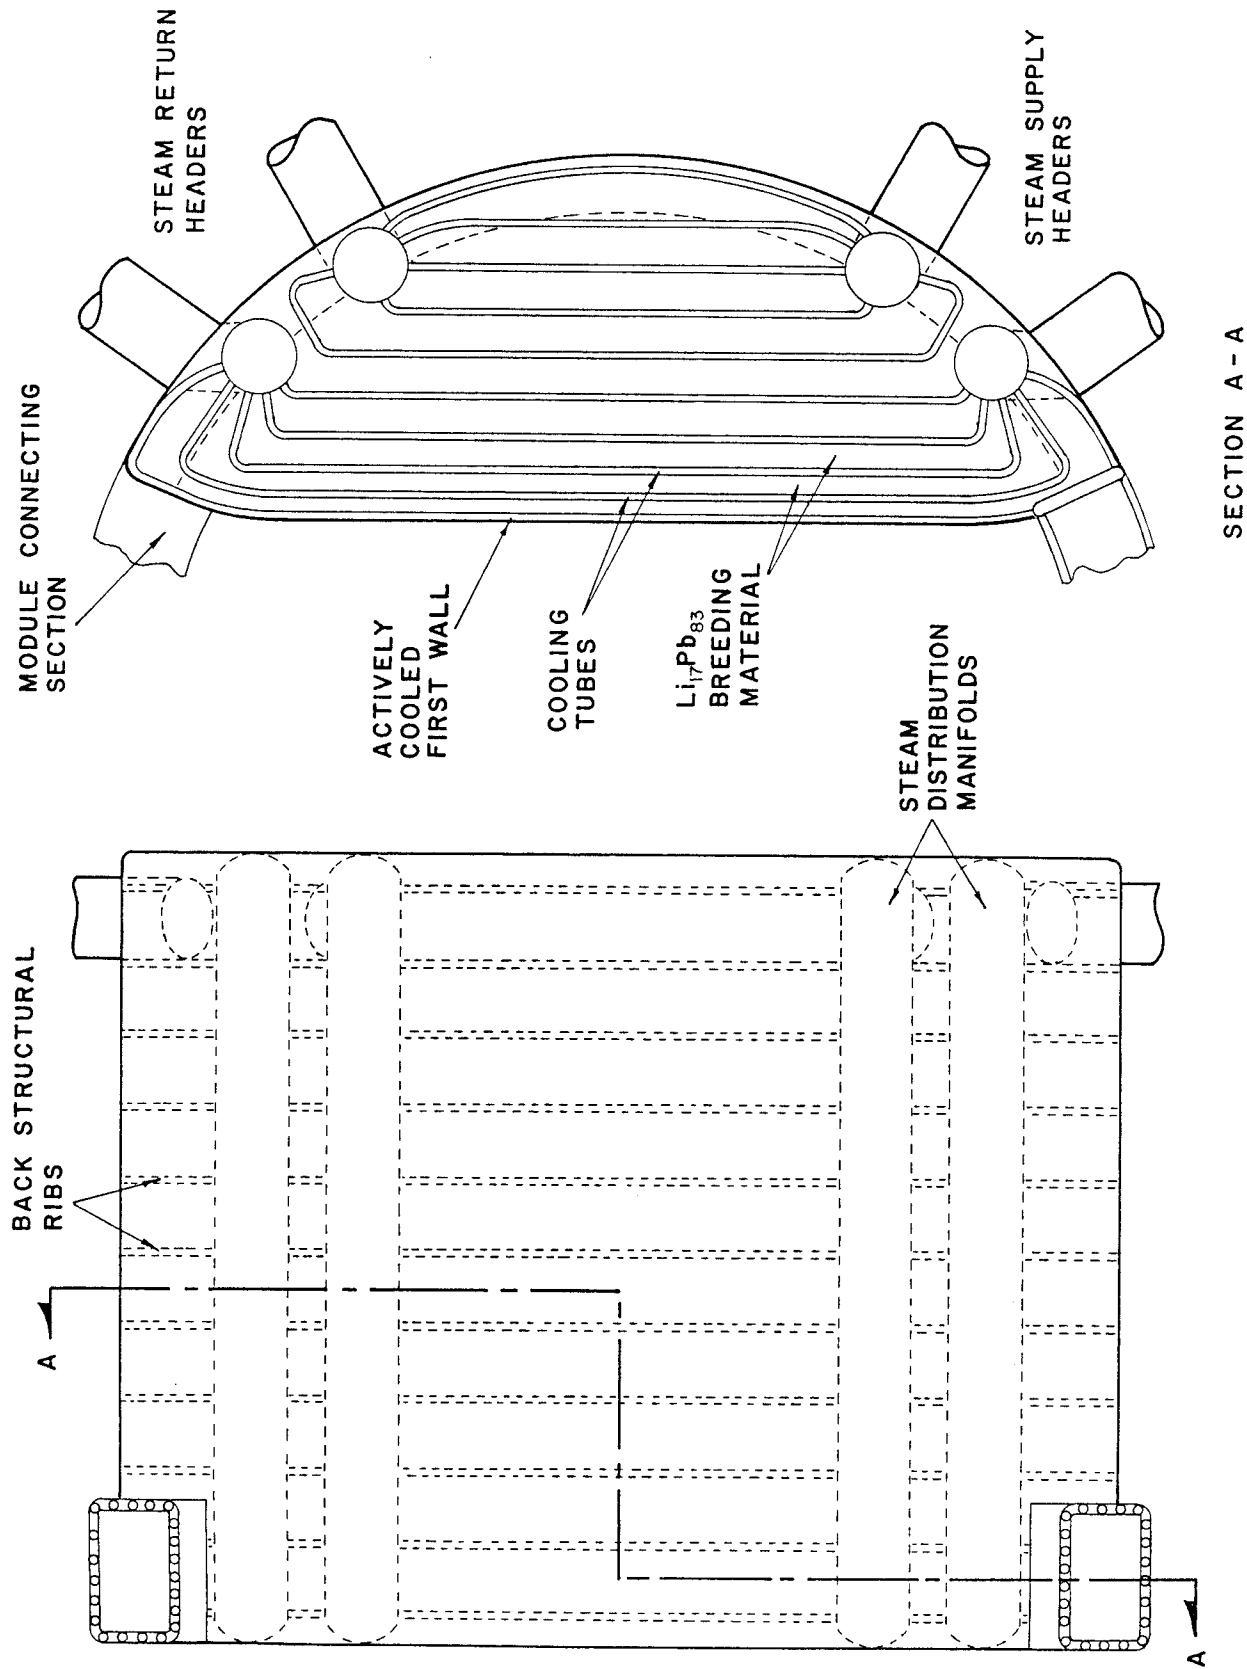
Plan view and a cross section of a part of a blanket segment.
